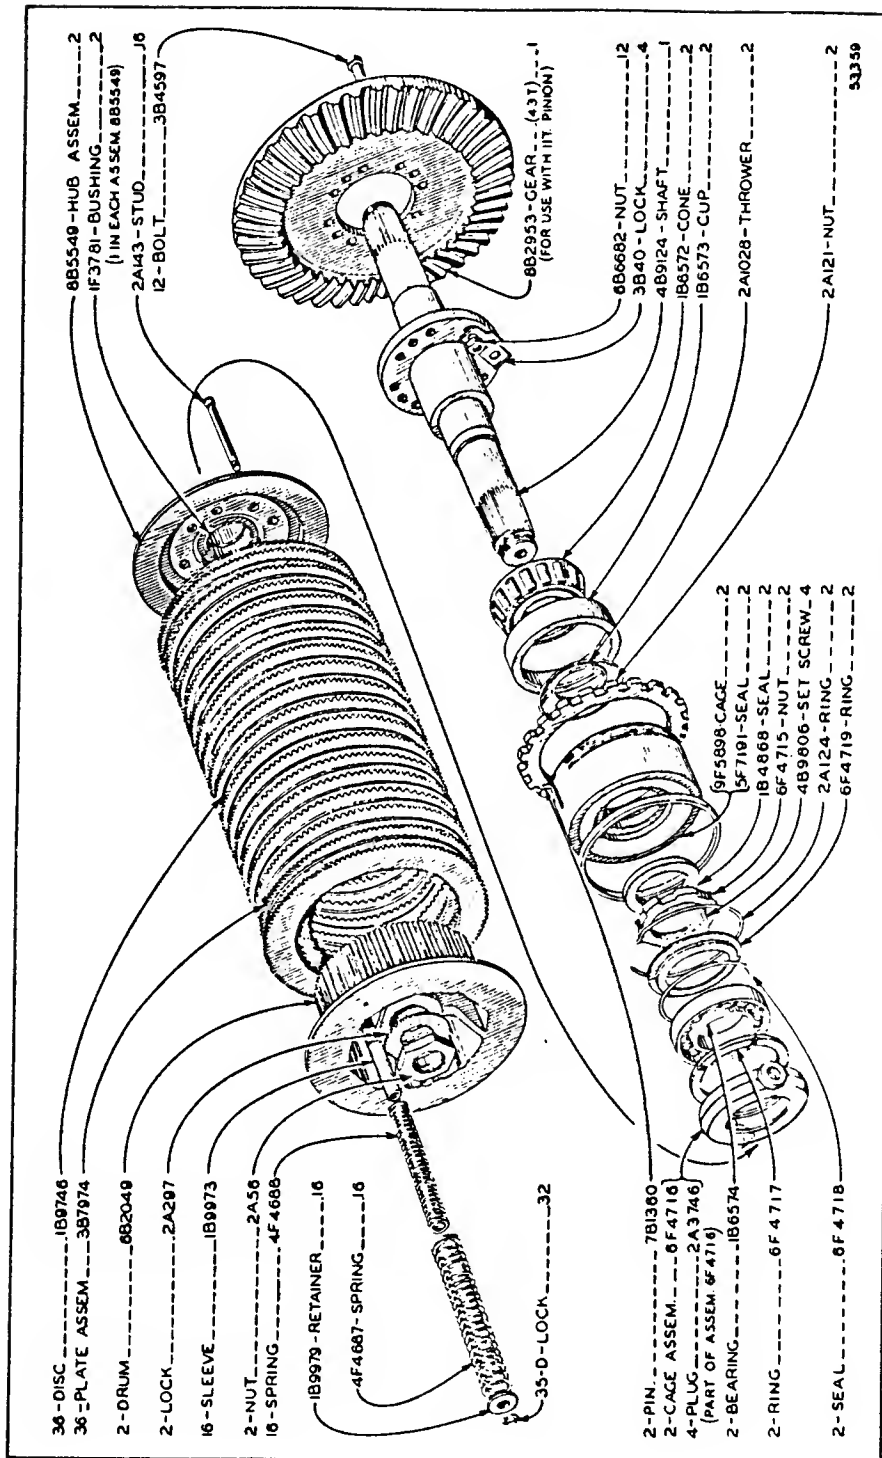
DETAIL OF CLUTCH FLYWHEEL SYSTEM
